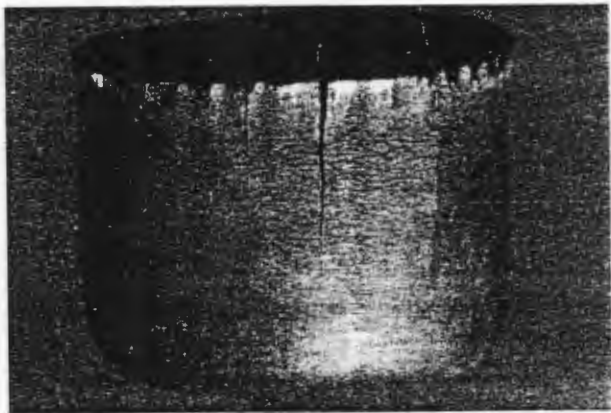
Delayed fracture in alloy 5623Cu0 after LDR testing.
